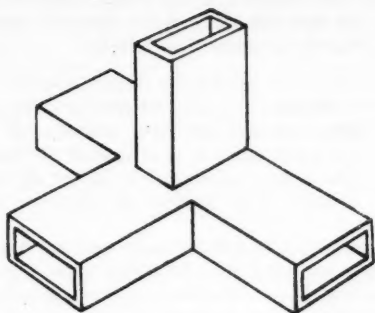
Hybrid tee fabricated with extruded waveguide without flange connectors.
